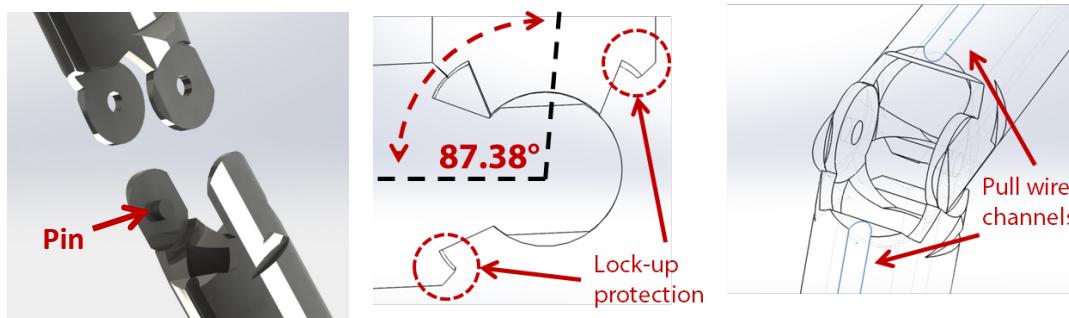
Exploded view of the top and bottom portions of the catheter joint, with the pin highlighted (left); the maximum theoretical bend angle of the catheter as a result of a lock-up protection mechanism (center); pull wire channels integrated into the catheter lumen (right)
